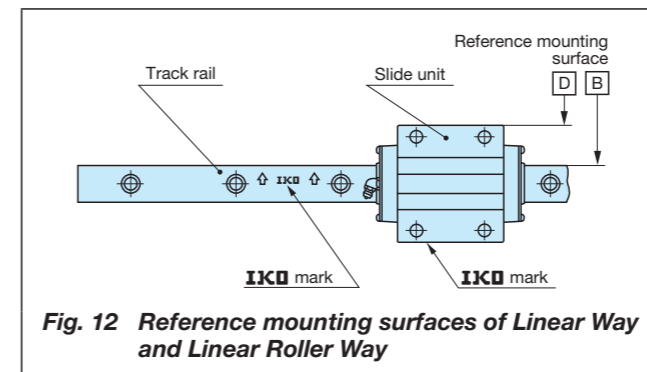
Reference mounting surfaces of Linear Way and Linear Roller Way
